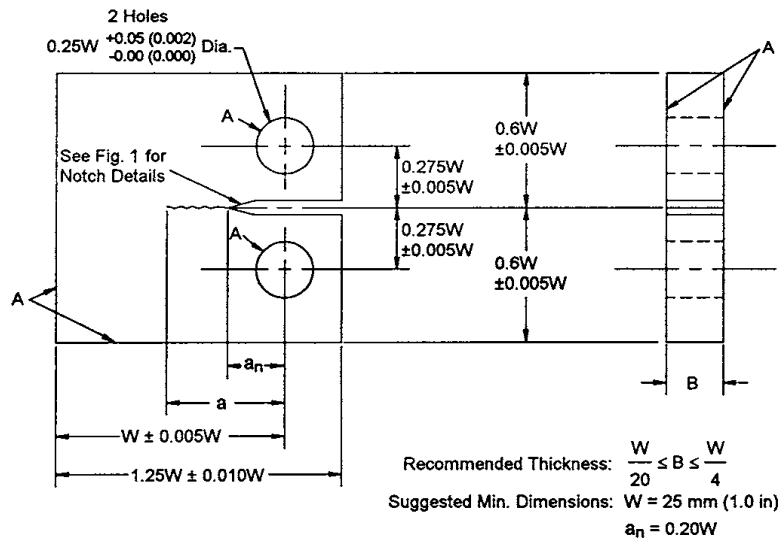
The configuration of compact tension C(T) specimen for fatigue crack growth rate testing due to ASTM E647 standard [5].
